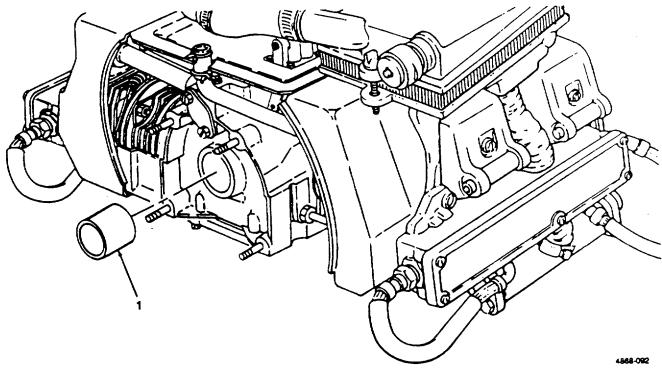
Crankshaft Rear Bearing, Replacement.
